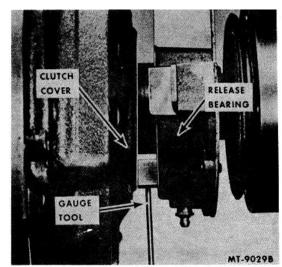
Checking Release Bearing Adjustment Without Clutch Brake (Dana Angle Spring Clutch)
